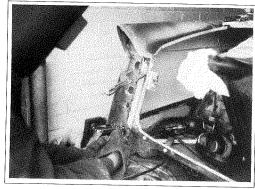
Secure the new assembly with as many clamps as possible and after checking against every reference point noted before hacking the old wing off, welding can begin. Here, up the vertical pillar and along the horizontal seam inside the boot.
